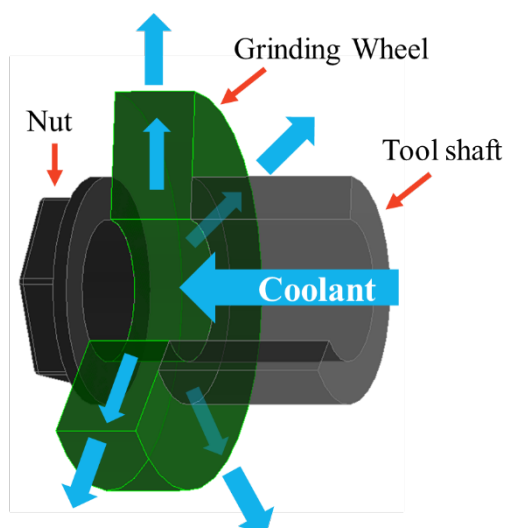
Schematic of the system of coolant supply from inner side of the grinding wheel
